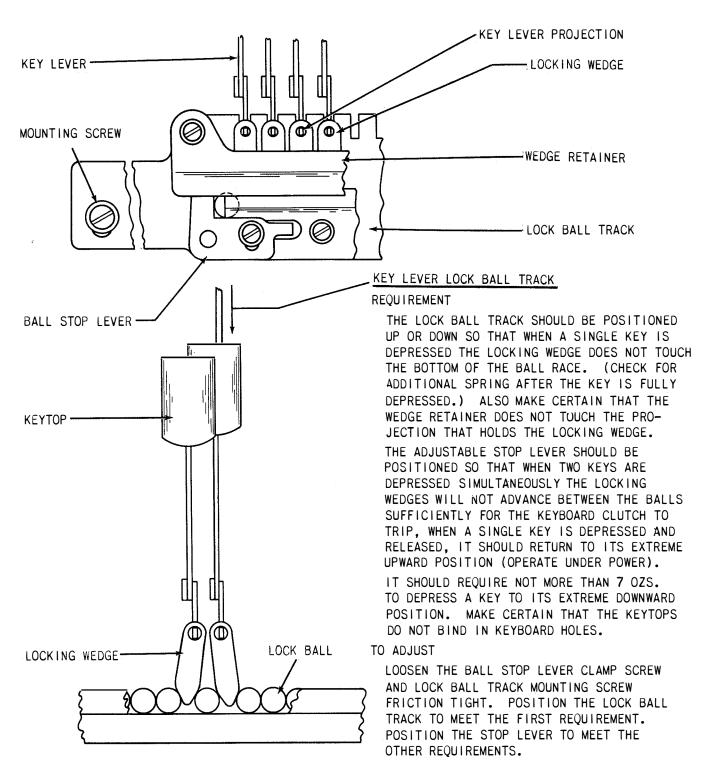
Keyboard, Key Lever Locking Mechanism
